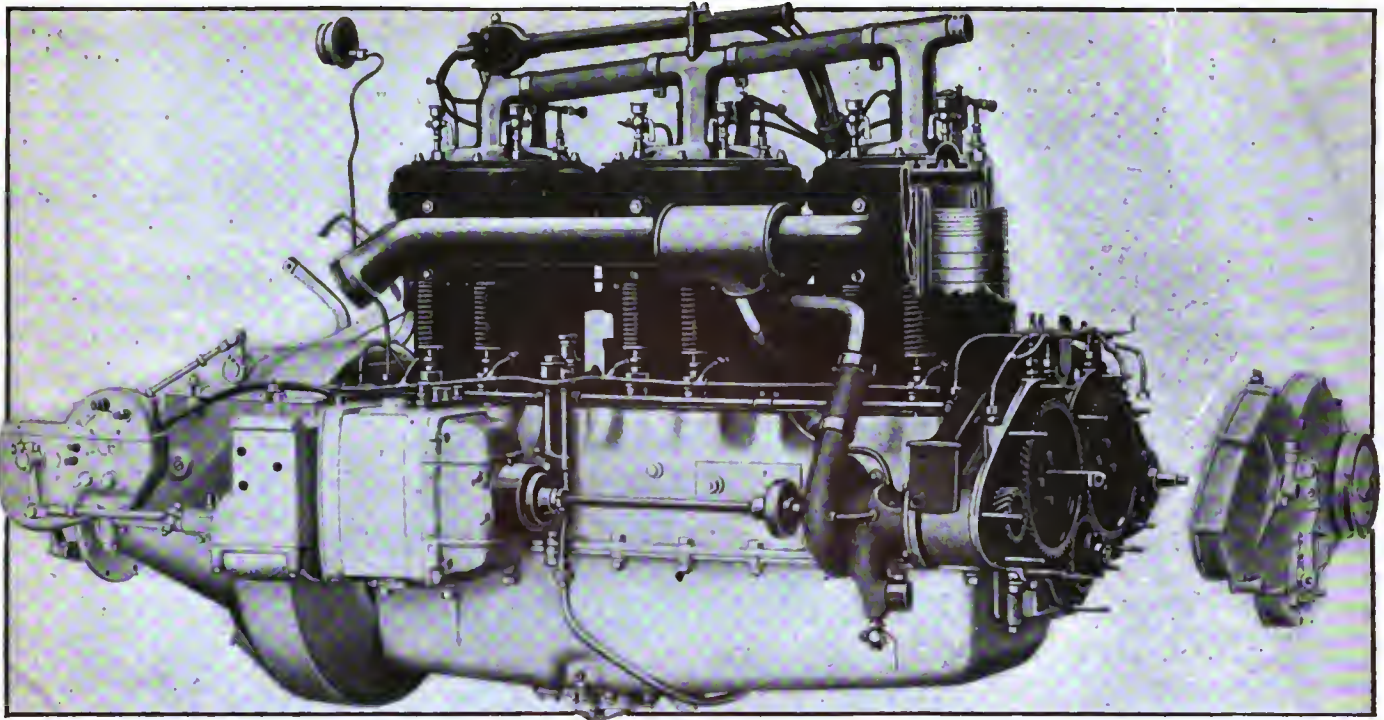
Showing the new Packard motor with the front cover removed, displaying timing gears
